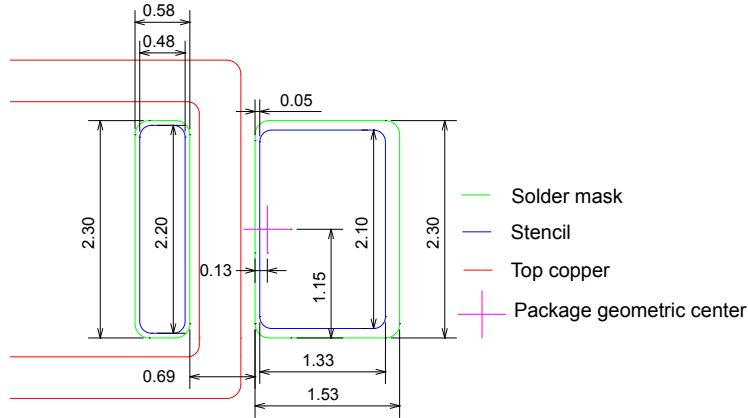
Recommended PCB solder pad layout for LUXEON 3030 HV.
